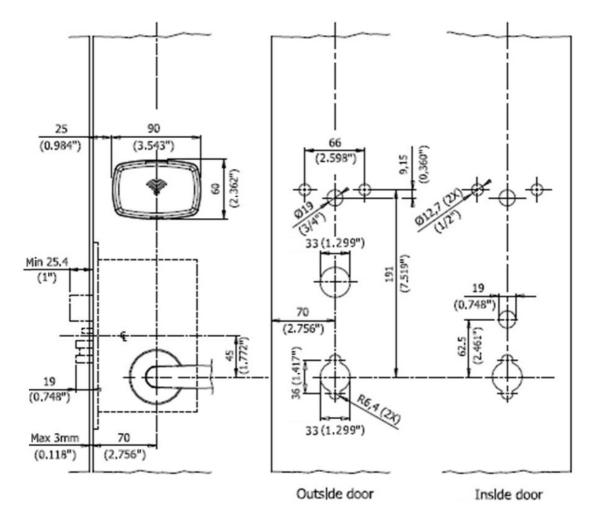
Dimensions in relation to the side view for ANSI (DA)
